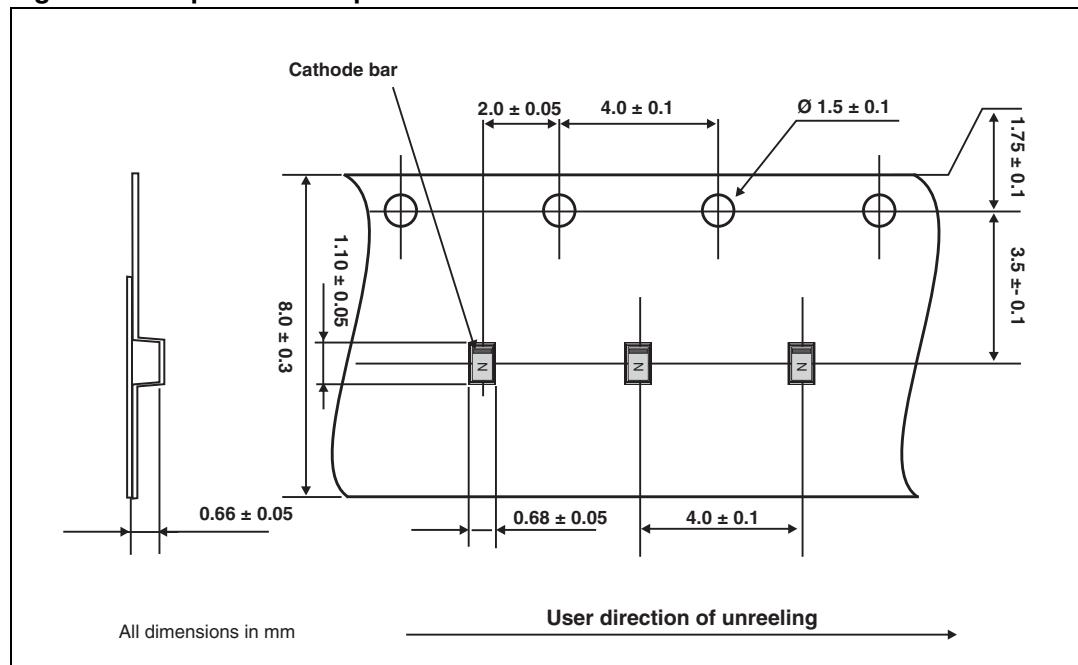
ST Ecopack® recommended soldering reflow profile for PCB mountingFigure 13. Tape and reel specifications
